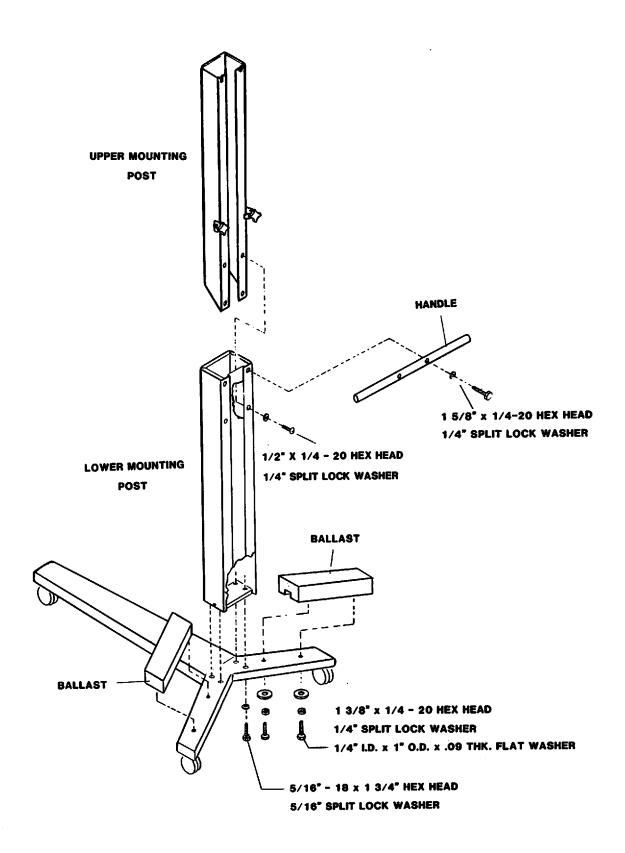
ASSEMBLY OF UPPER AND LOWER MOUNTING POSTS AND BASE ASSEMBLY
